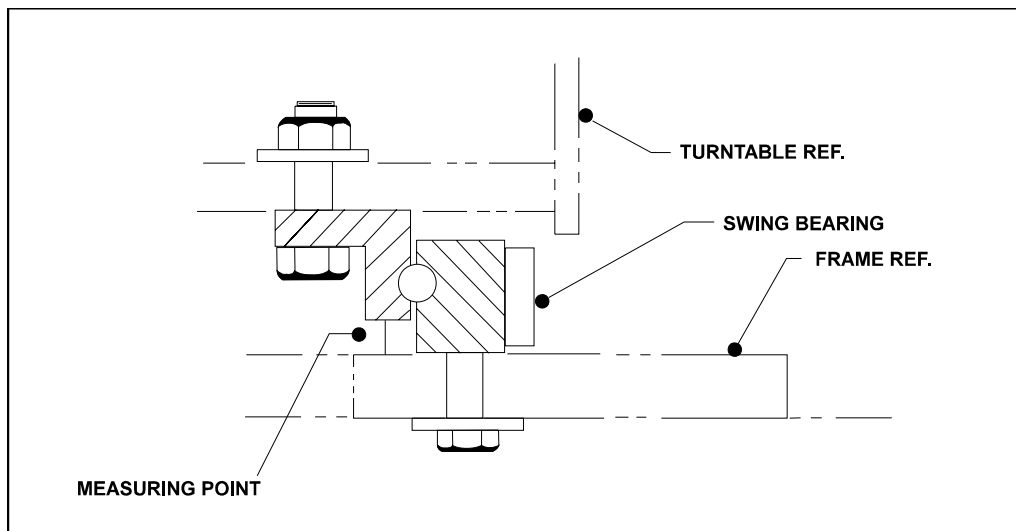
Swing Bearing Tolerance Measuring Point
